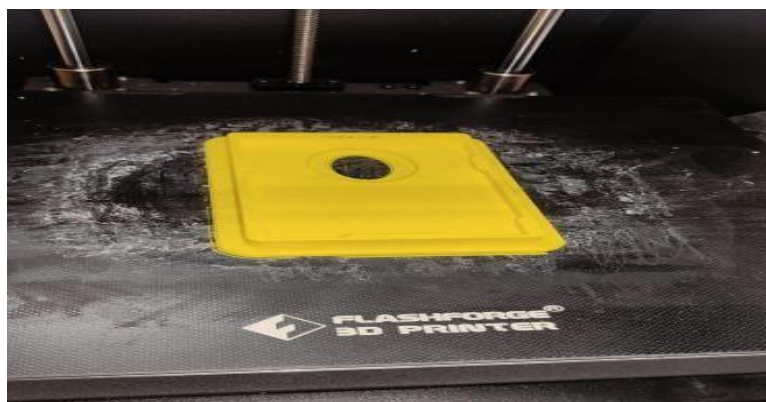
3D printed prototype of the customized ID-Card fabricated using PLA material FDM technology, demonstrating the successful transformation of the CAD design into a functional and personalized physical component.
